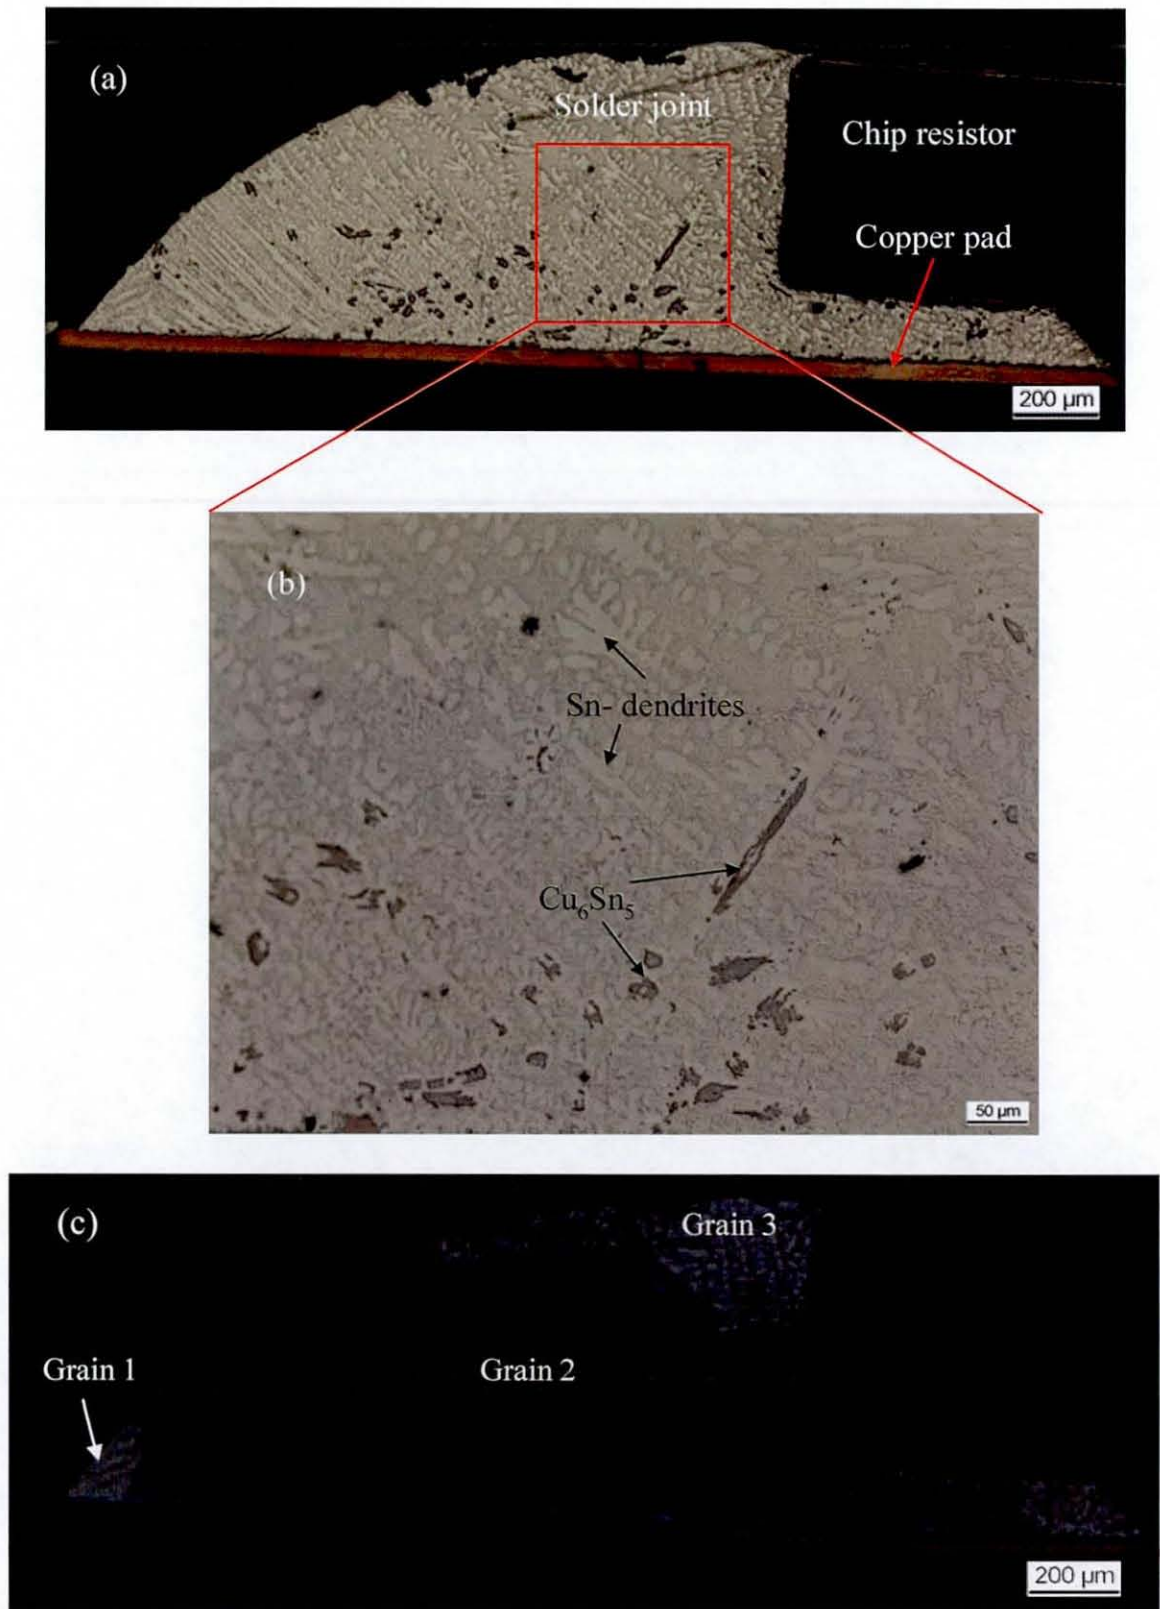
Microstructure of a solder joint in a chip resistor assembly: (a) general view; (b) zoomed view; (c) grain structure
